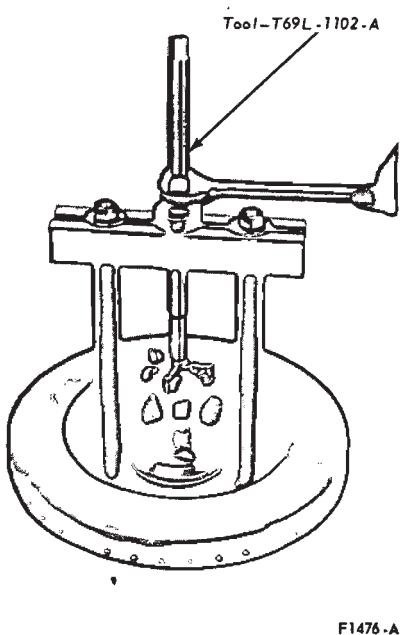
Removing Front Wheel Bearing Cups—Disc (Drum-Type Similar)
